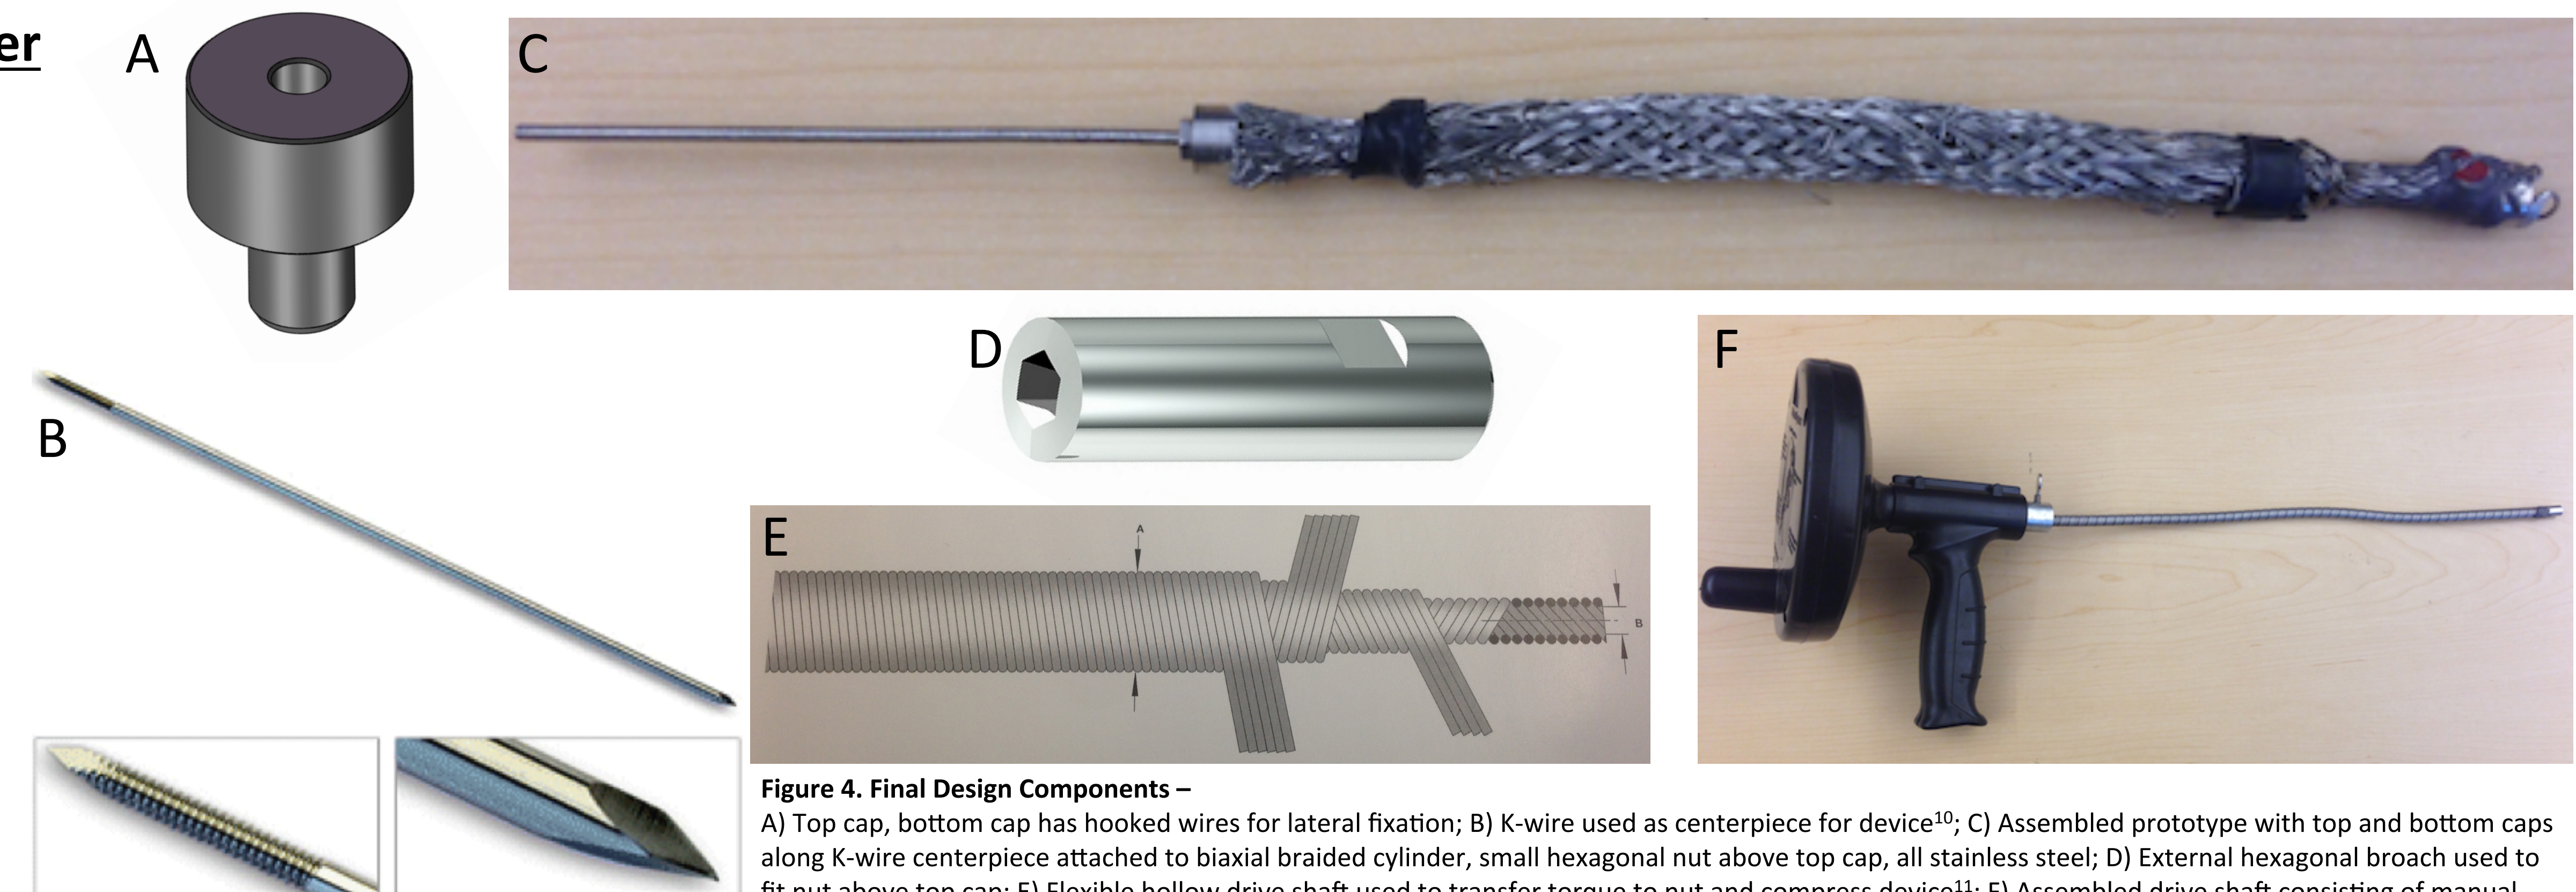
Final Design Components – A) Top cap, bottom cap has hooked wires for lateral fixation; B) K-wire used as centerpiece for device<sup>10</sup>; C) Assembled prototype with top and bottom caps along K-wire centerpiece attached to biaxial braided cylinder, small hexagonal nut above top cap, all stainless steel; D) External hexagonal broach used to fit nut above top cap; E) Flexible hollow drive shaft used to transfer torque to nut and compress device<sup>11</sup>; F) Assembled drive shaft consisting of manual auger connected to flexible drive shaft with hexagonal broach on tip.
